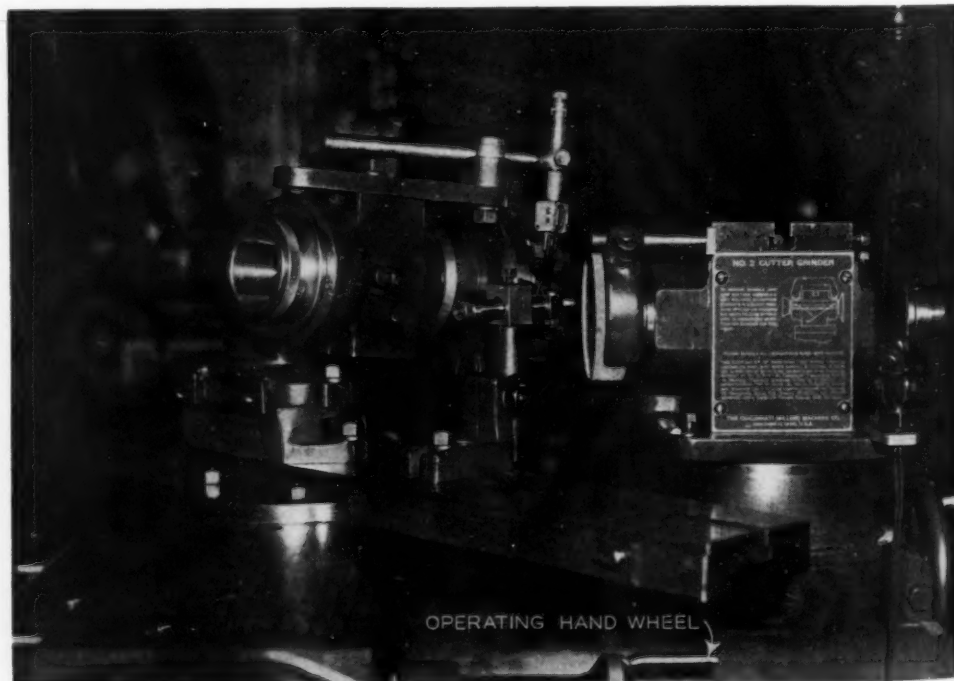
GRINDING THE CORNER OF MILLING-CUTTER TEETH
